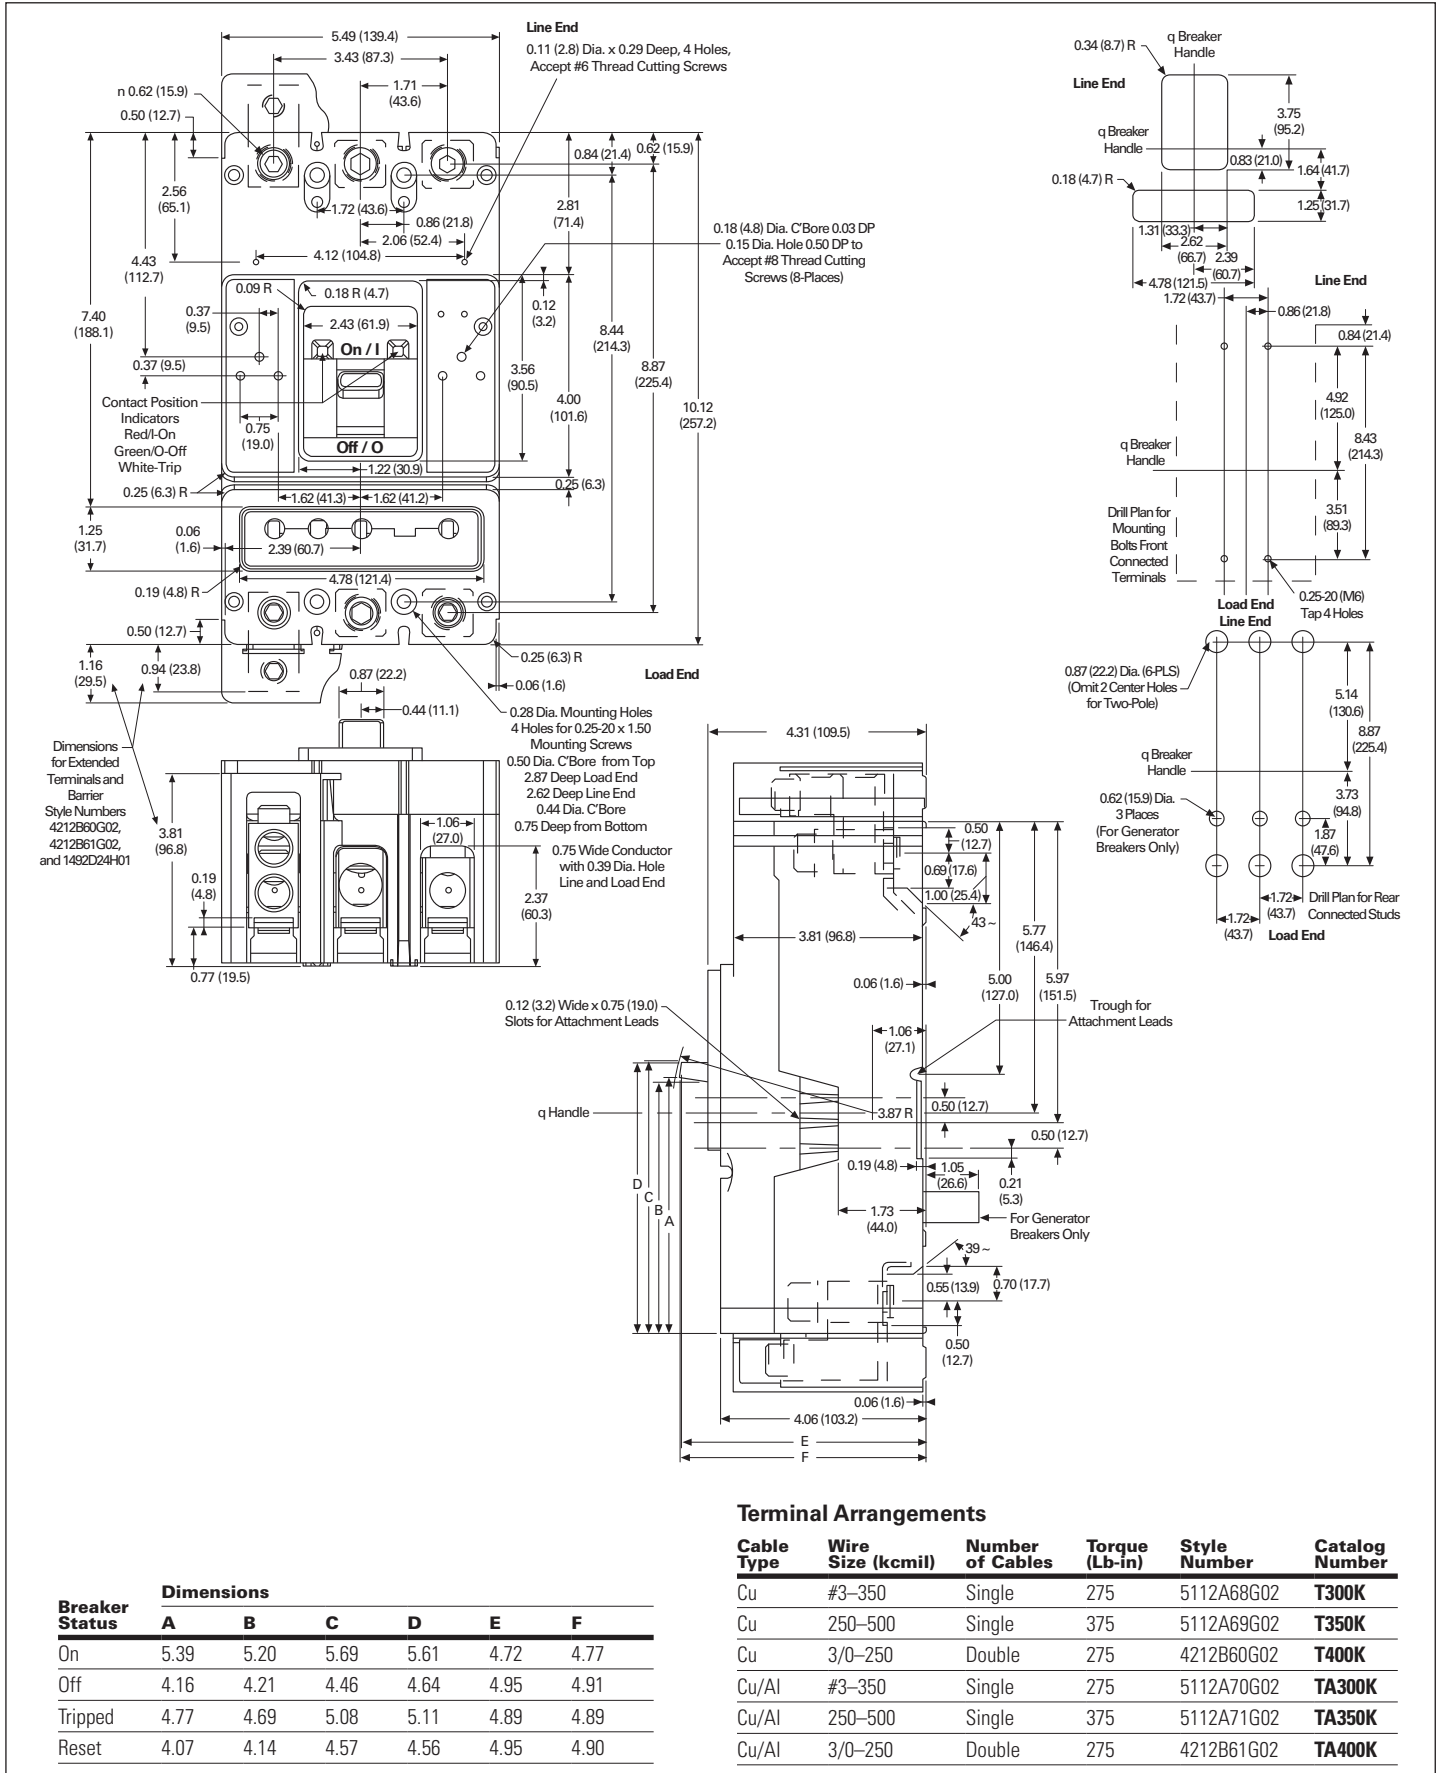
Type KG 300-400A Three-Pole—Dimensions in Inches (mm)
